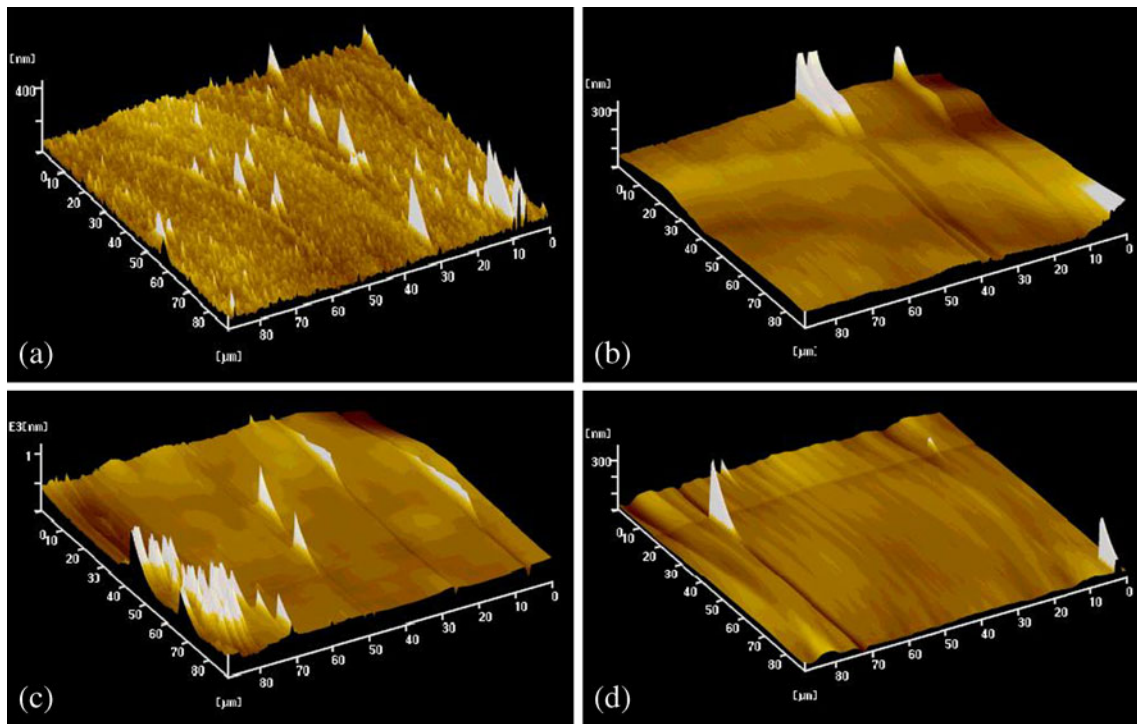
AFM image of machined surface using a circular, b D-shaped, c triangular, and d square tool
